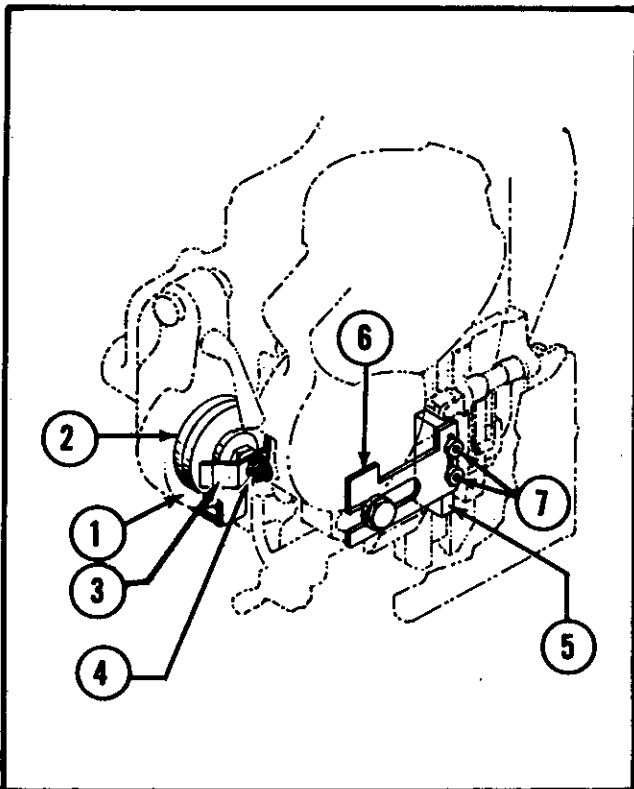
Wire Feed Brake Tension and Wire Guide Adjustments (Long and Extra Long Draw Heads)
